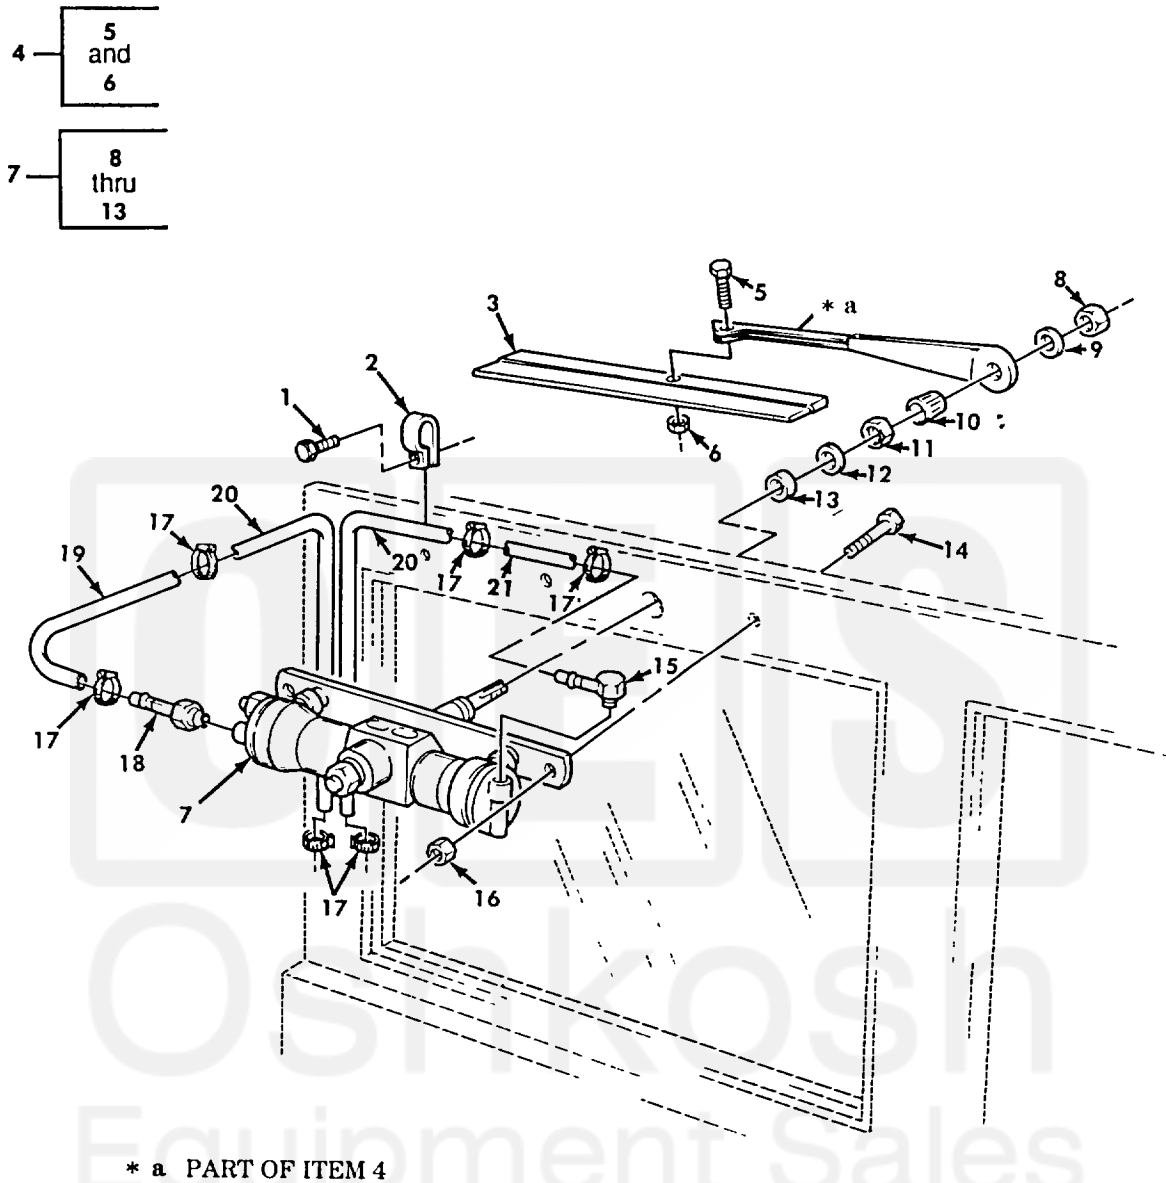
Windshield Wiper Arm, Blade, and Motor Assembly (Old Style).
